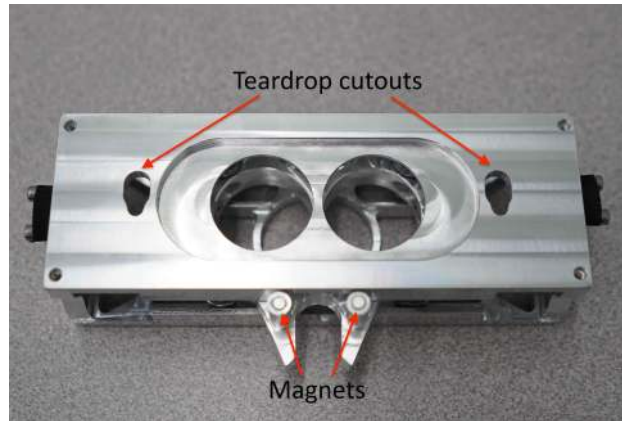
Install slipper block in bearing tracks with magnets up. Install top plate with the small end of the teardrop slots towards the magnets
